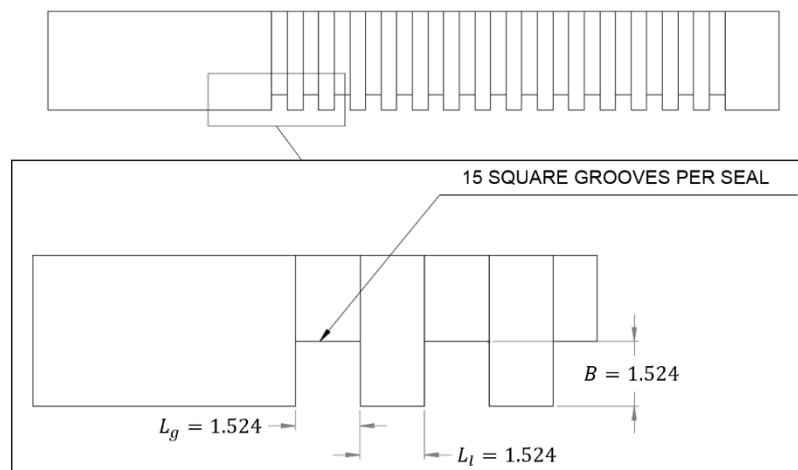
Detailed drawing of rotor grooves. All dimensions are in mm.
